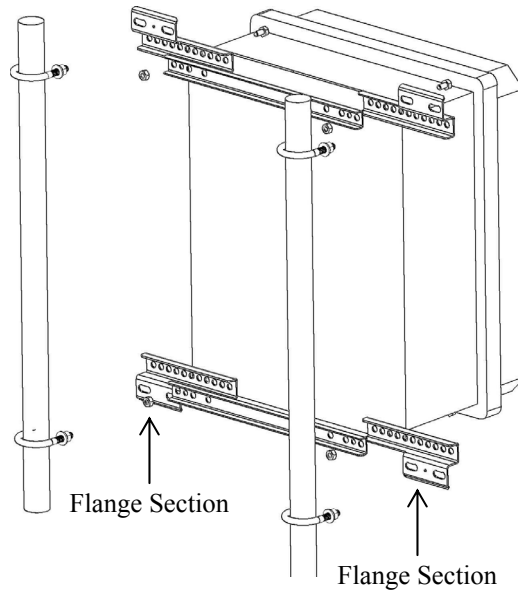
This exploded view shows the components of a “-TM” bracket option.
